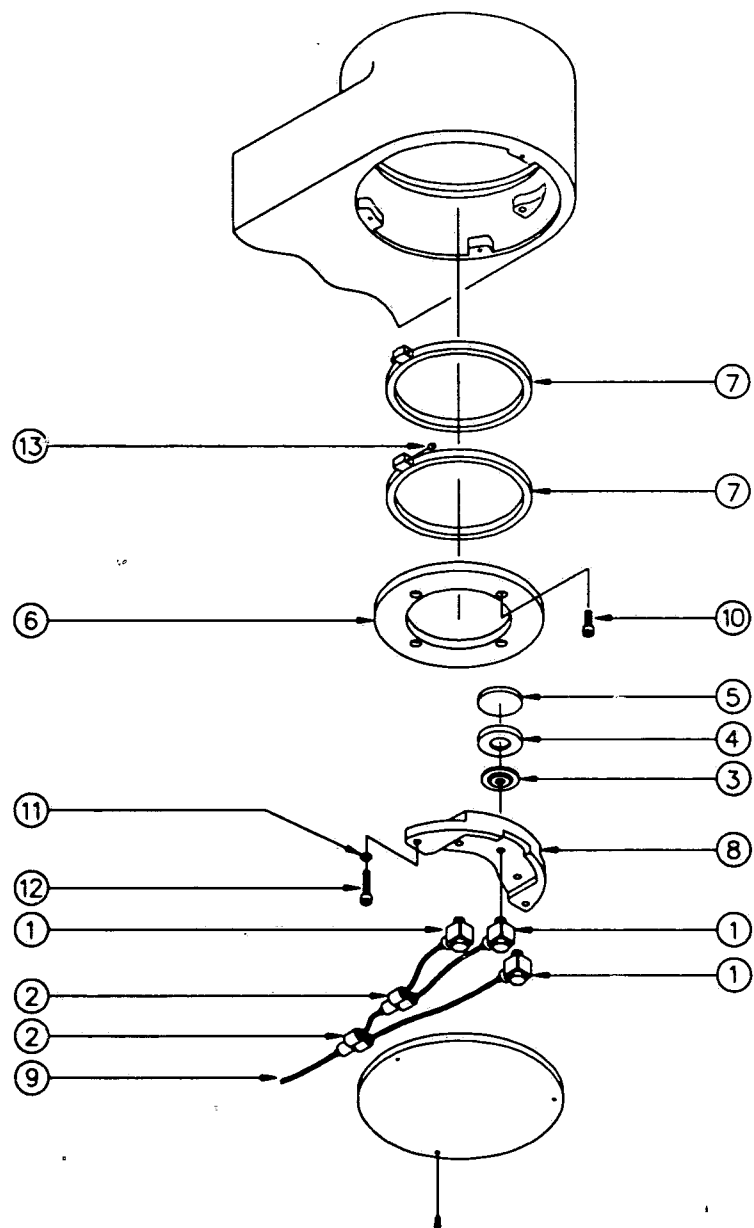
Rotational Stop and Air Brake Assembly, Upper Suspension Arm — Models 265 and 250F
